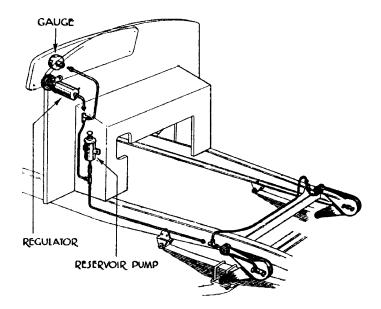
Layout of the hydraulically remote Andre Telecontrol damper, shown here on a front axle (The Motor Manual, 1939).
